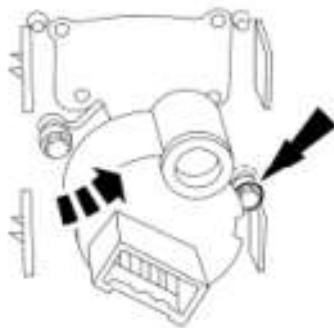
Locating Instrument Panel Finish Panel Over Screws
